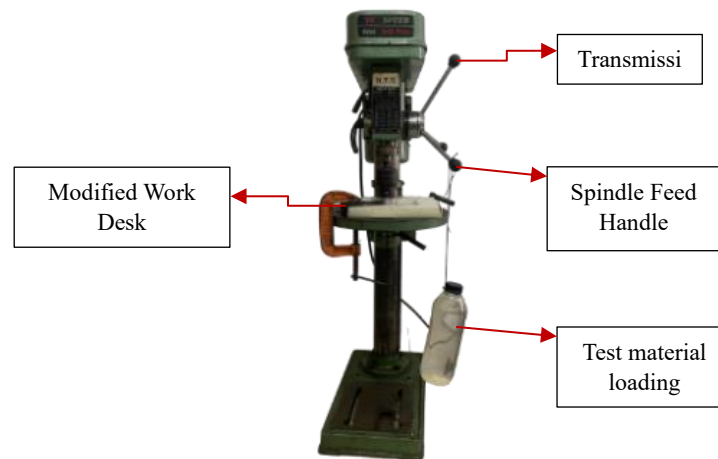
HTS drill machine (ZJQ4116) modified into a ball-on-disc tribomete
